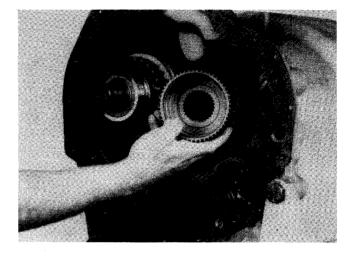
Remove 2nd clutch disc hub retainer ring retainer.
